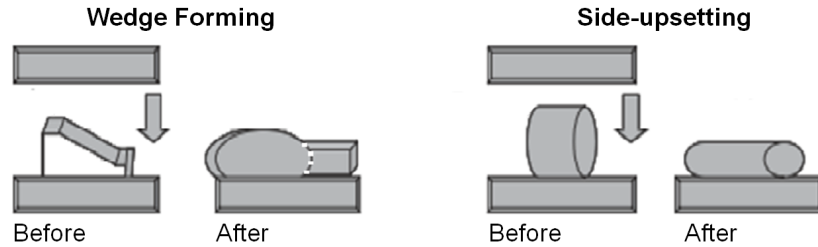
Schematic of the wedge forming and side stepping tests.
